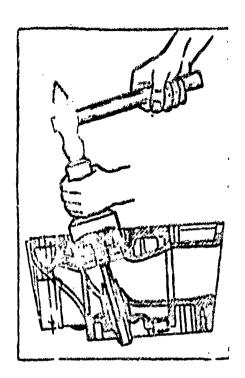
Pressing an inserted valve seat out of the cylinder head:
